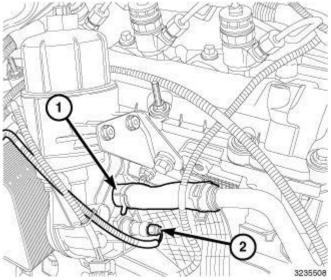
Coolant Hose & Oil Pressure Sensor Wire Harness Connector Courtesy of CHRYSLER GROUP, LLC
